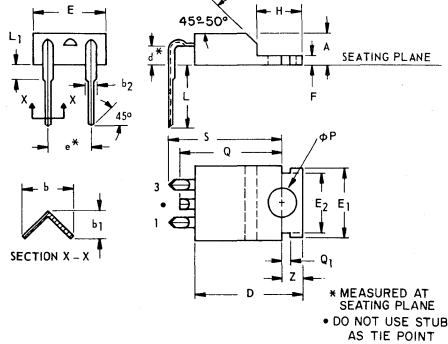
Dimensional outline of the JEDEC TO-220AB in-line-lead Versawatt transistor package.
